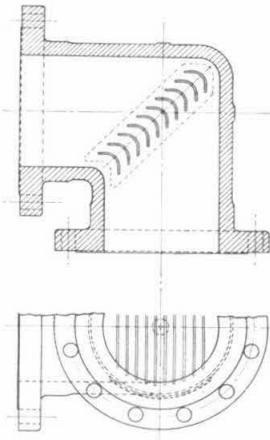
SECTION THROUGH THE CAST-IRON VANE ELBOW
